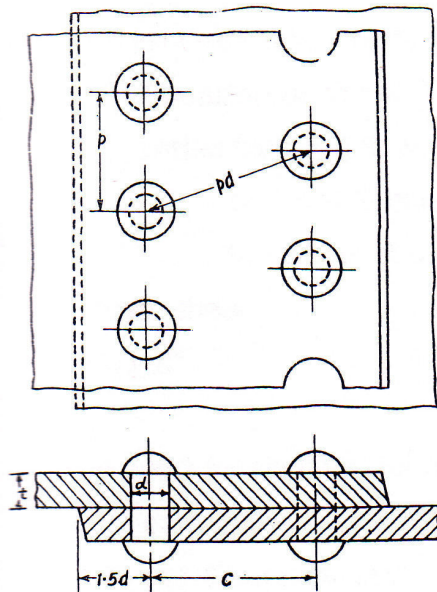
Double-riveted lap joint (Zig-zag riveting).
